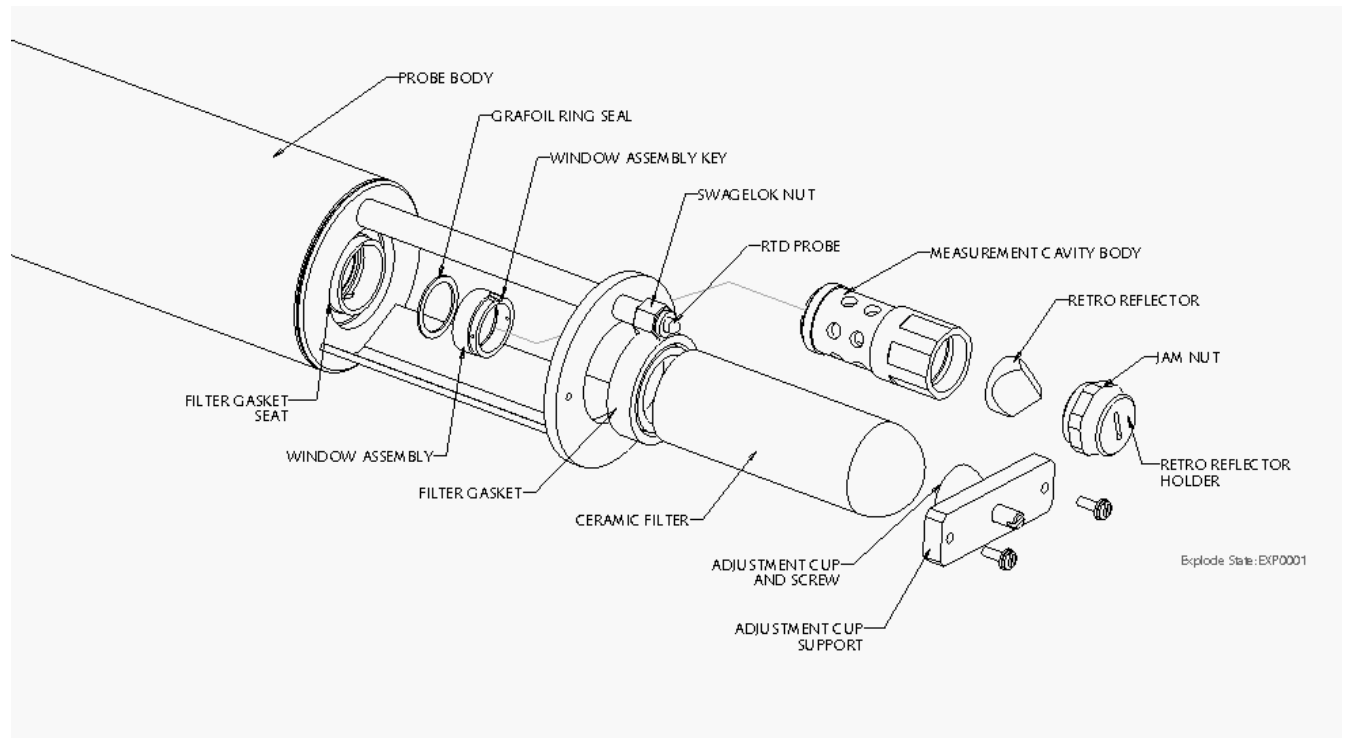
Probe Tip Assembly (For 10cm, 20cm or 30cm with extender cavities)
